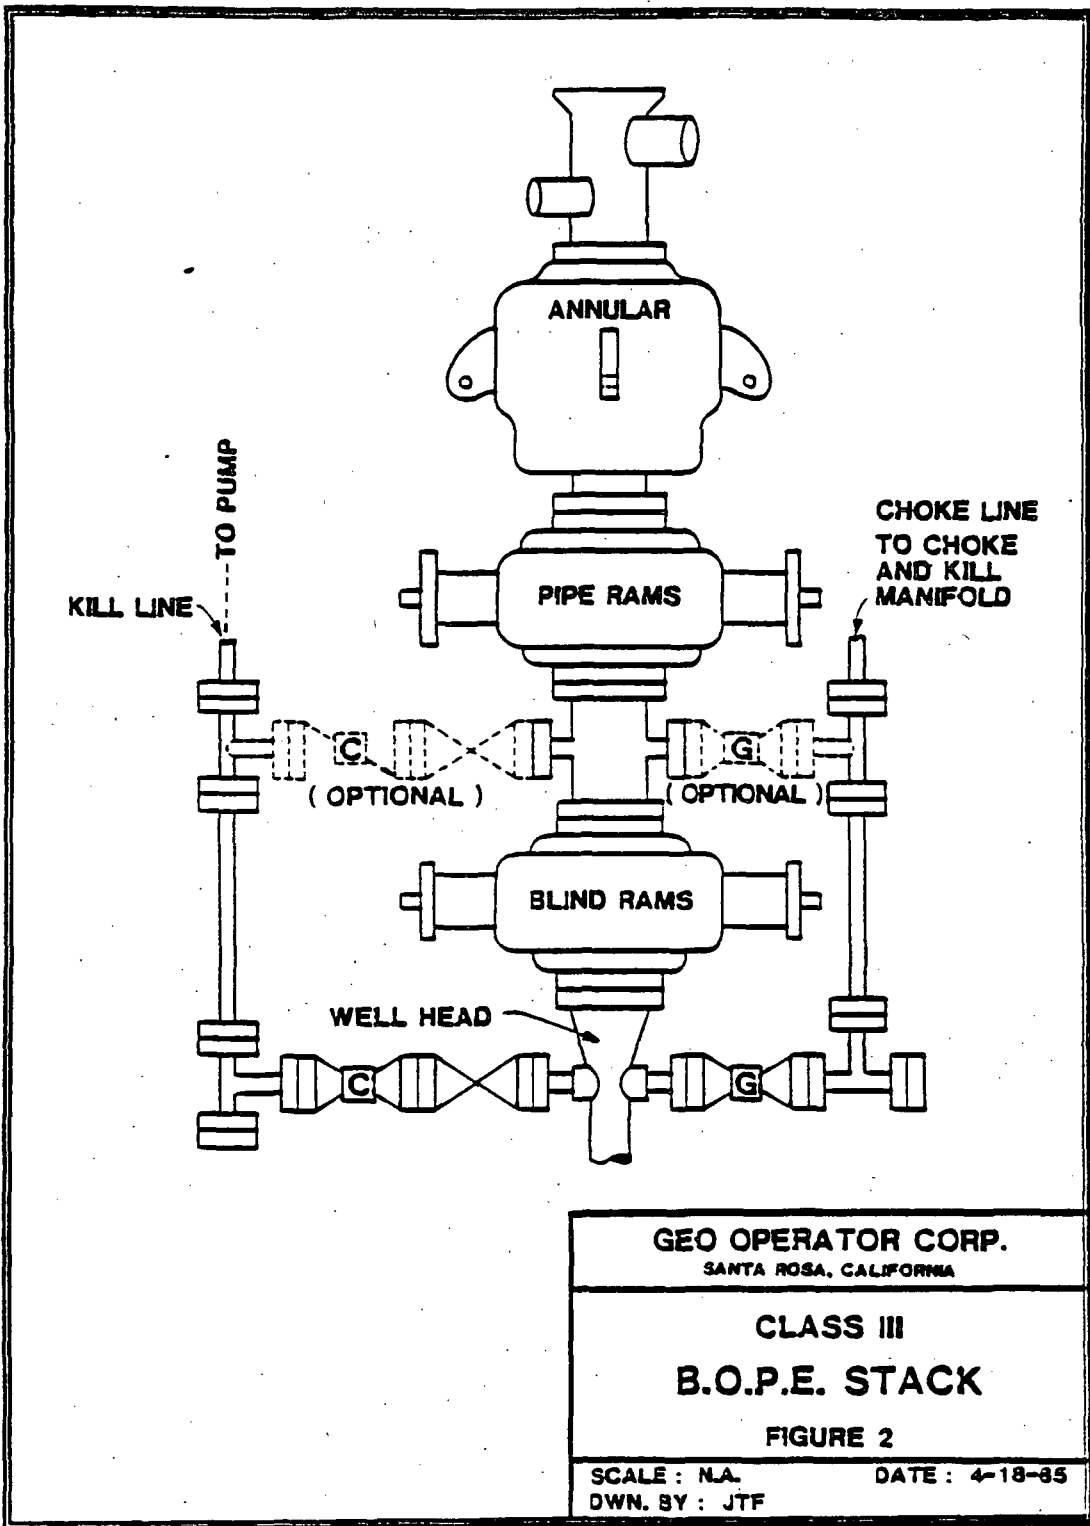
Wellhead assembling and blow out prevention equipment
